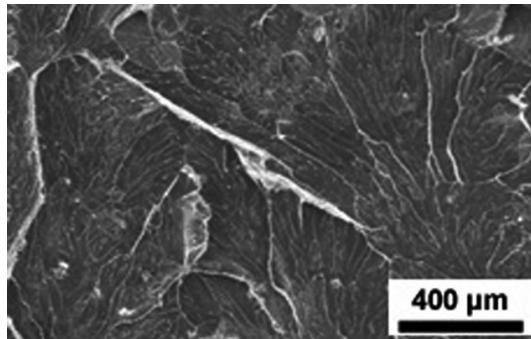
Fracture surface of a Charpy impact specimen from the weld.
